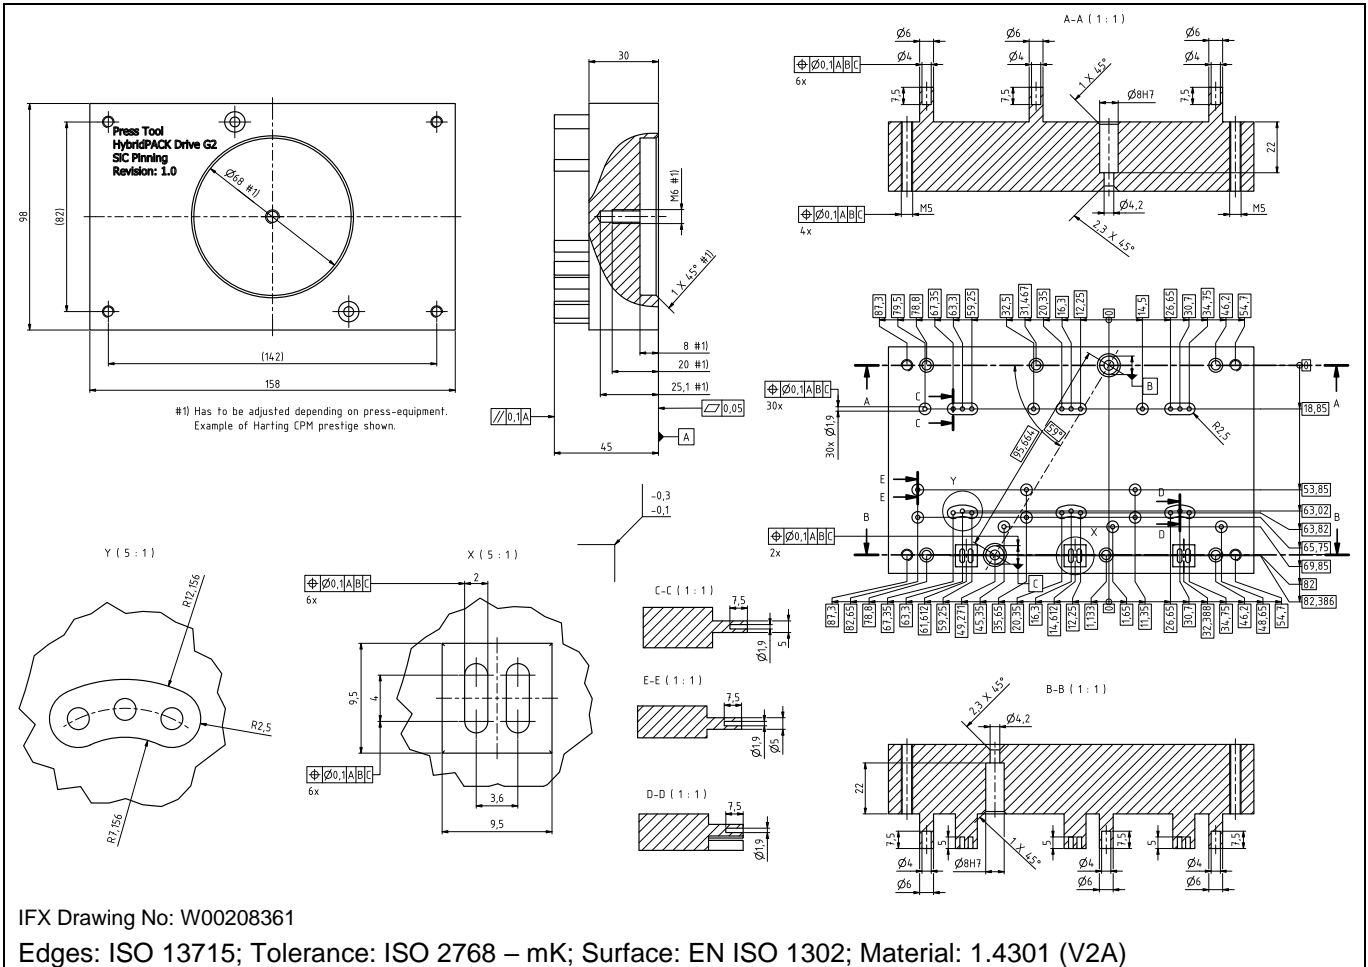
Technical drawing of the sample press-tool SIC MOSFET signal pinning (top tool).
